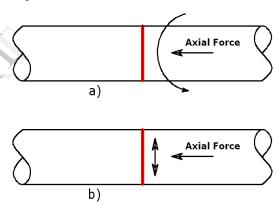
Schematic drawing of rotary friction welding a), and linear friction welding b)
